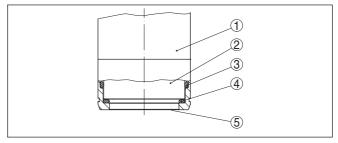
Front-flush installation of the CERTEC® measuring cell with double seal
